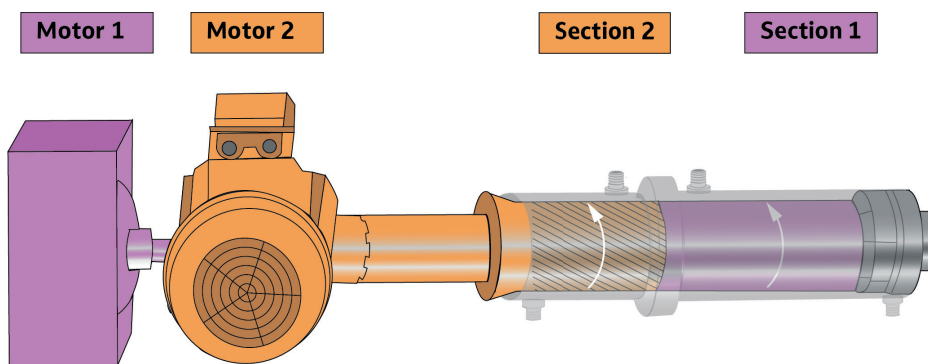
Graphical representation of the rotating die. Section 1 (purple) is connected to motor 1 with a long inner axis, which is placed inside section 2 (orange) and the axis of section 2. Section 2 is connected to motor 2. Both motors can be separately regulated to achieve desired rotational speed, indicated with solid arrows. Heating for the two sections was regulated separately to 85 and 10 °C respectively.
